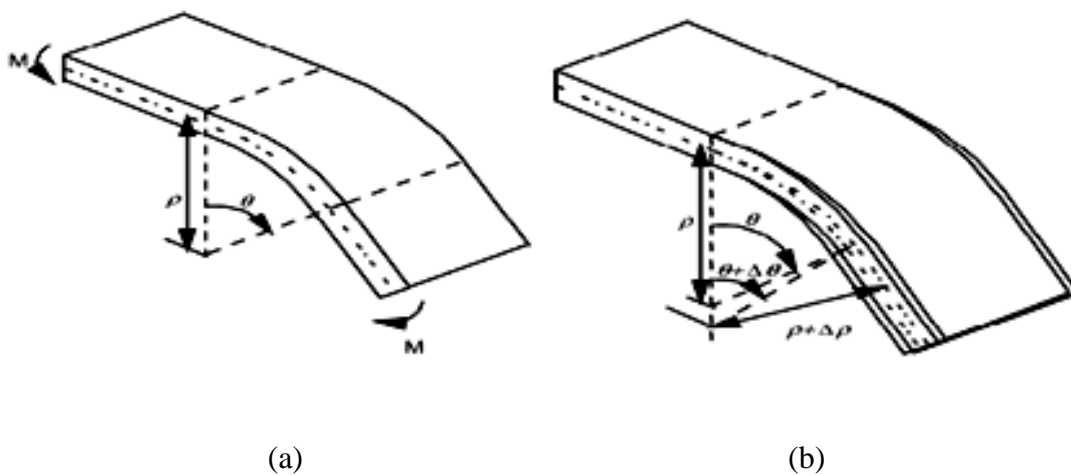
Schematic of sheet bending and resultant springback. (a) bending on the sheet and (b) continuous bending with larger angle
